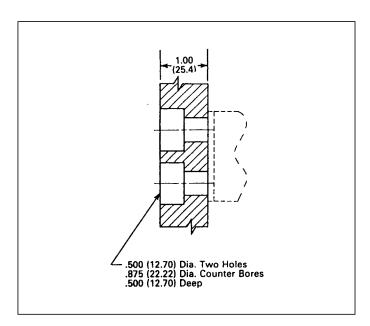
Hole Sizes for Installing Walking Beam Mounting Bracket
